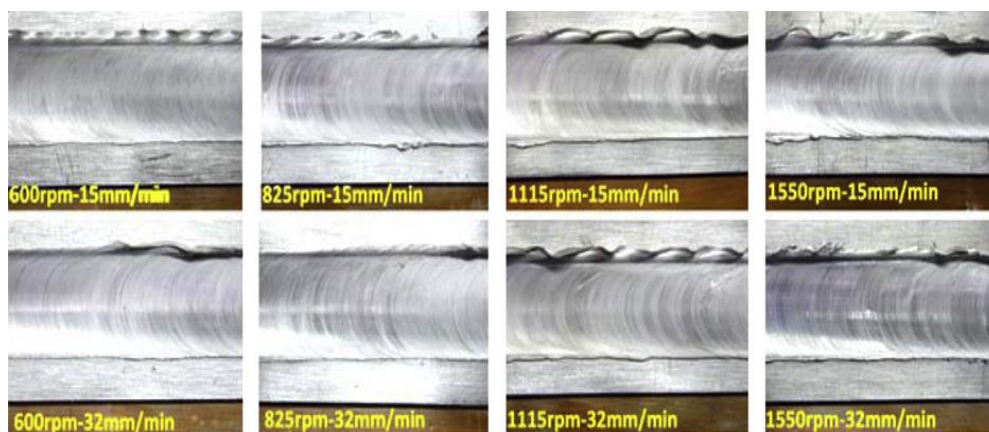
Lap joint surfaces welded in different conditions.
